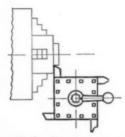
Side of tool is used to take a 1" deep broad-face cut.
